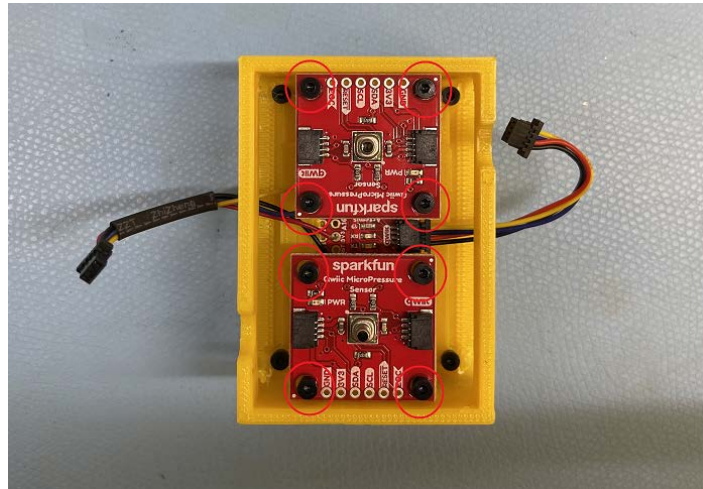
Pressure sensors are mounted securely onto the pressure sensor mount
